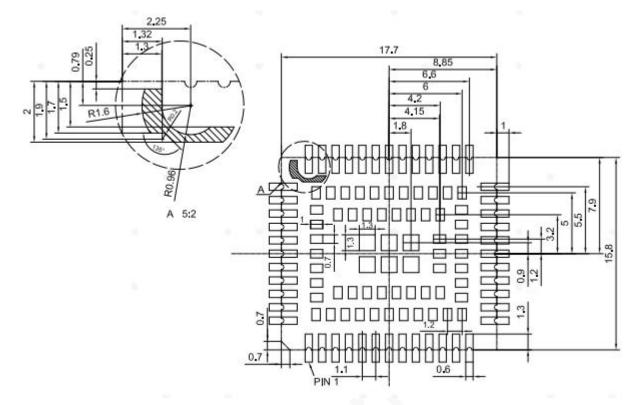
N706-CB PCB foot print (top view, unit: mm)
